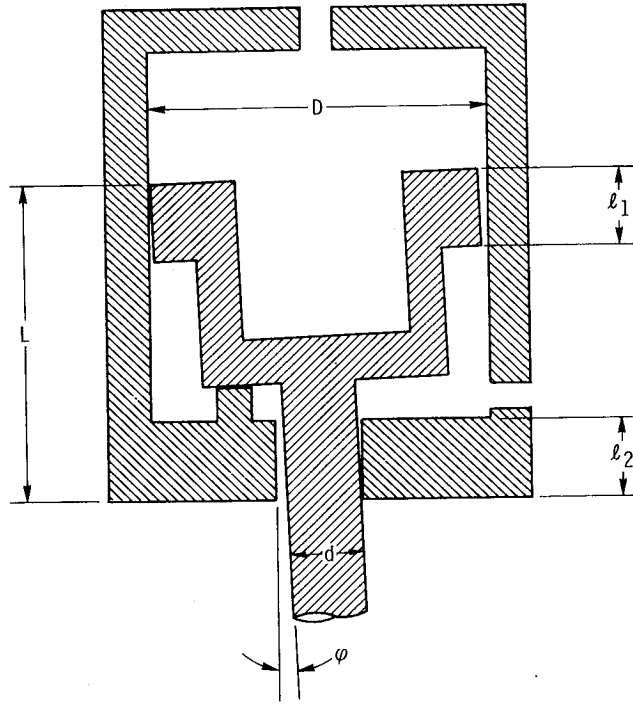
Sketch illustrating parameters involved in piston guiding.
